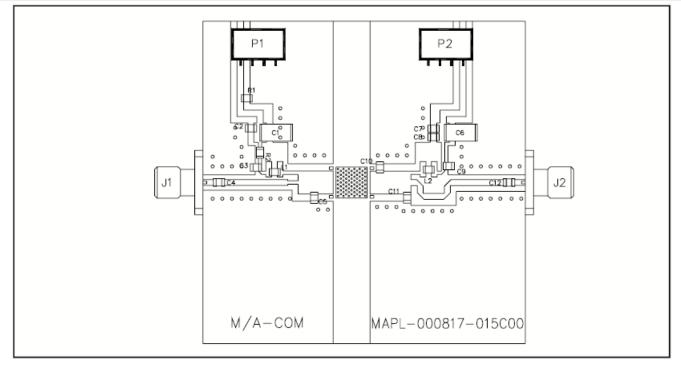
1620—1670 MHz Test Fixture Component Layout
